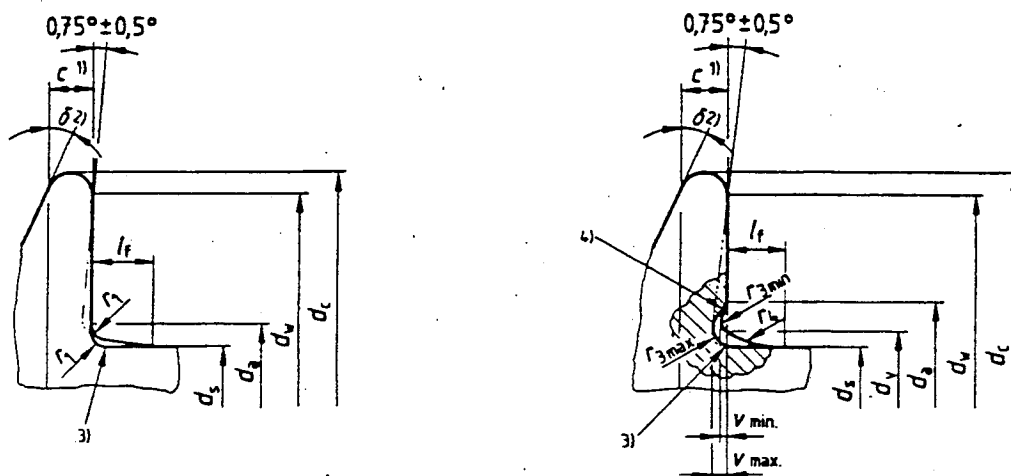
Hexagon bolt with flange – Full shank (standard type)
